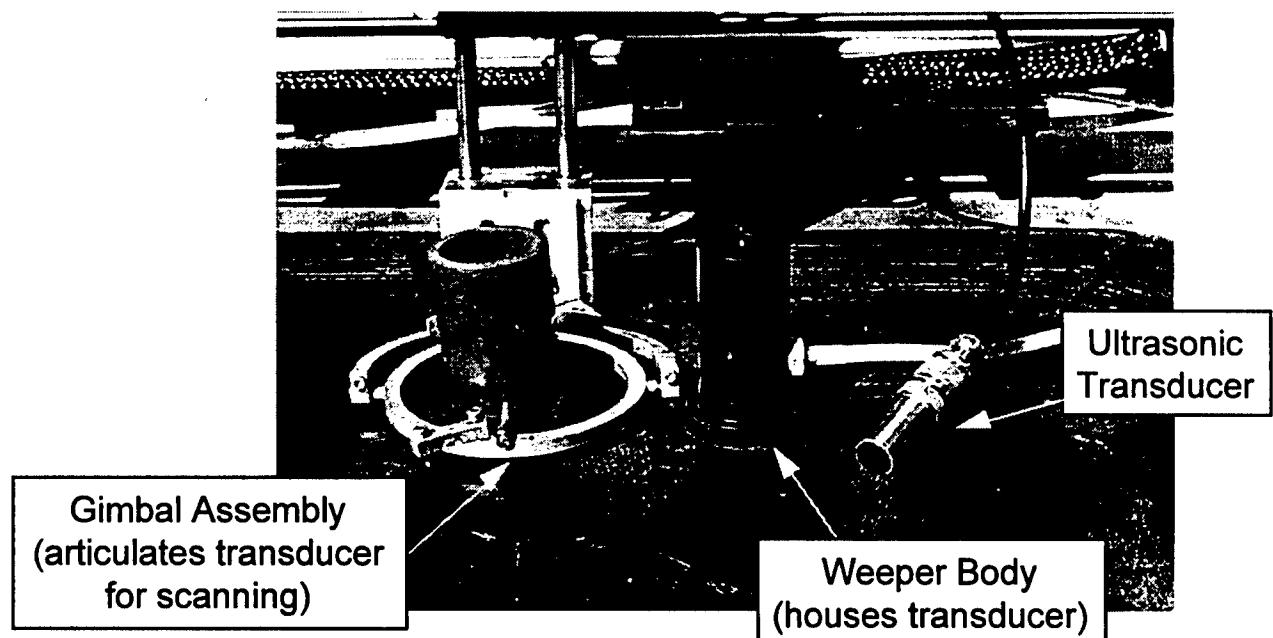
Photograph of Transducer Assembly for Scanning (transducer fits inside the weeper body which is mounted in the gimbal assembly)
